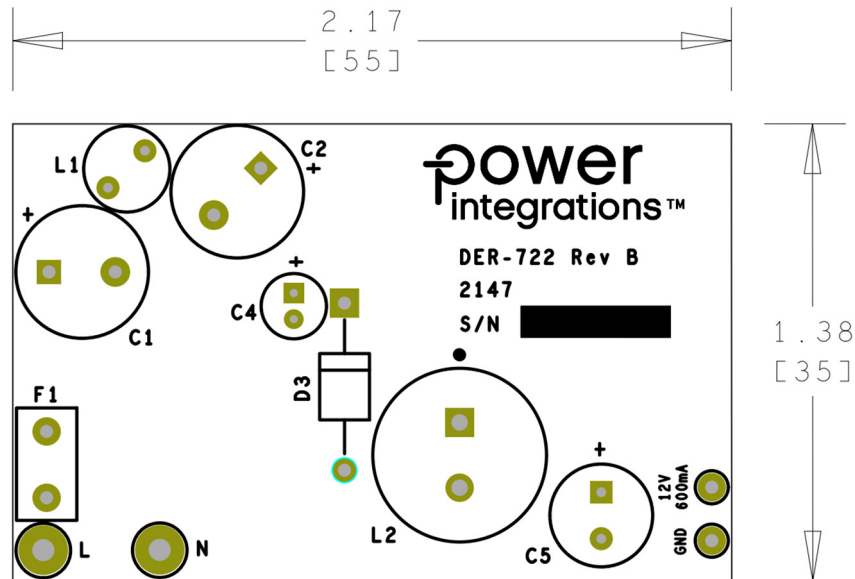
Printed Circuit Layout, Top (2.17" [55 mm] L x 1.38" [35 mm] W).
